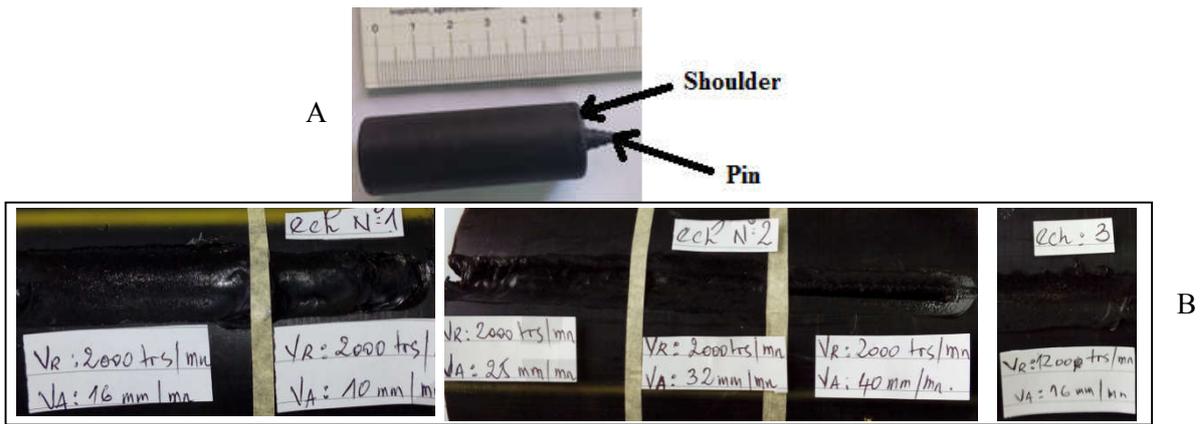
A The welding tool, B pehd welded samples
